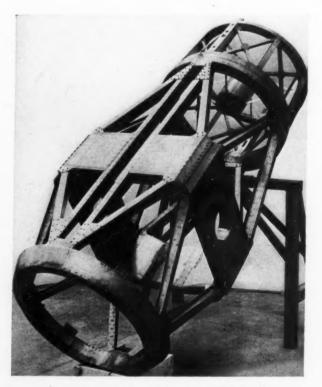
Tube is made in eight main welded subassemblies which are riveted together
